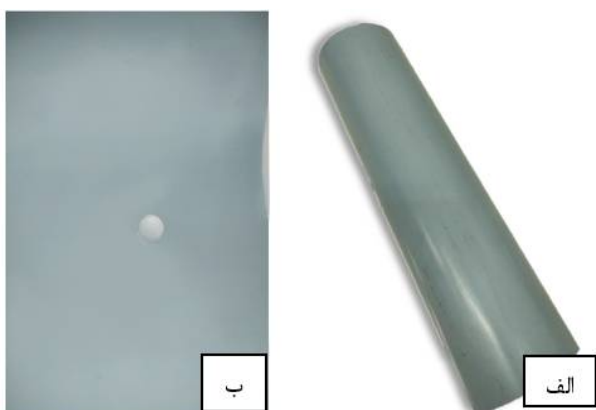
a) A sample of PVC pipe. b) 10 mm Surface defects created on the inner surface of the sample
